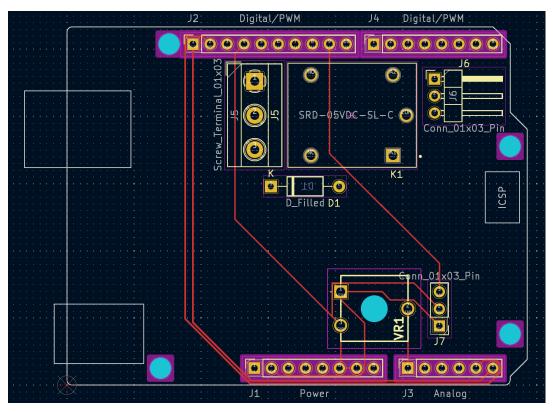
PCB layout in KiCad. a figure of the PCB layout for the arduino shield made in KiCad.
